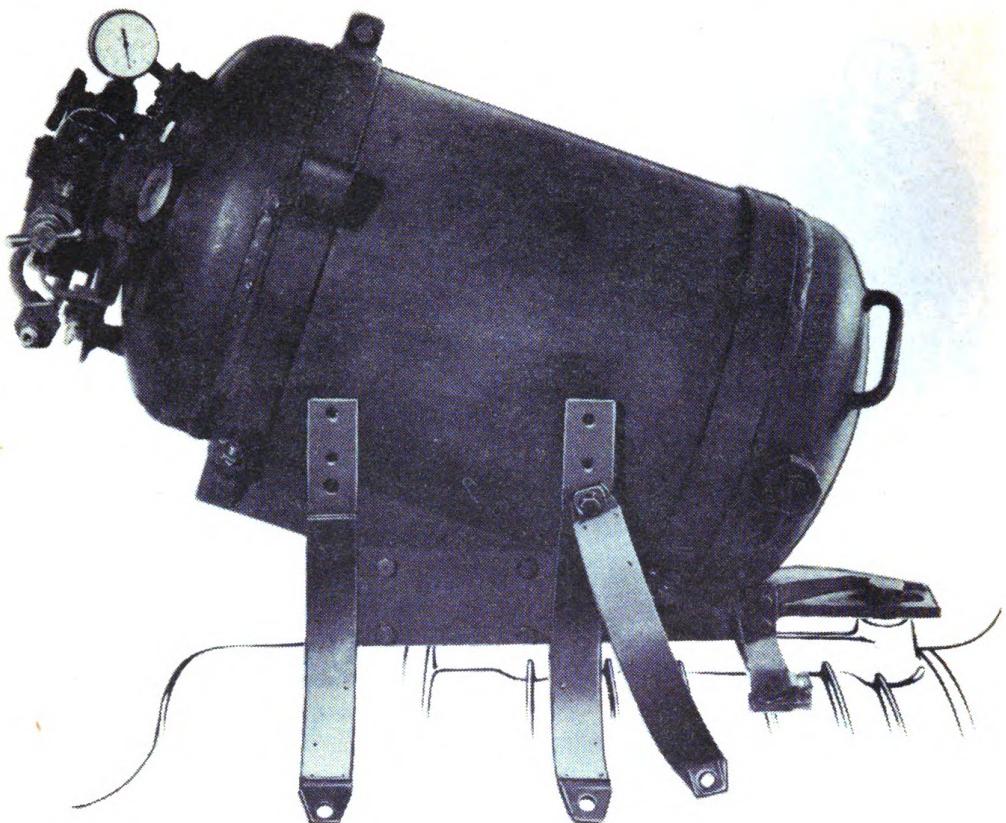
Back pressure container straps and right front pressure container strap ready to receive pressure container.
